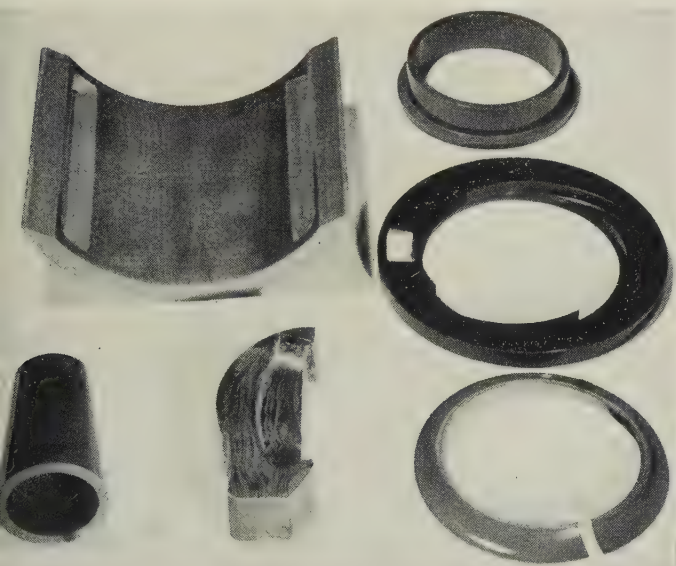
Rolling-Mill Bearing, Piston Ring, Thrust Bearing Race Collar, Blade Centre Bush (Fabric-Filled Phenolic Plastics). By courtesy of The Bushing Co., Ltd.
